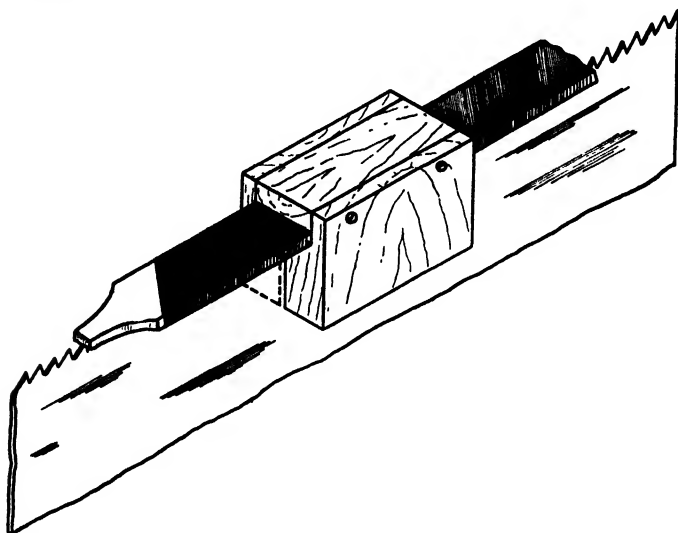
A homemade holder for holding the file while jointing a saw.
